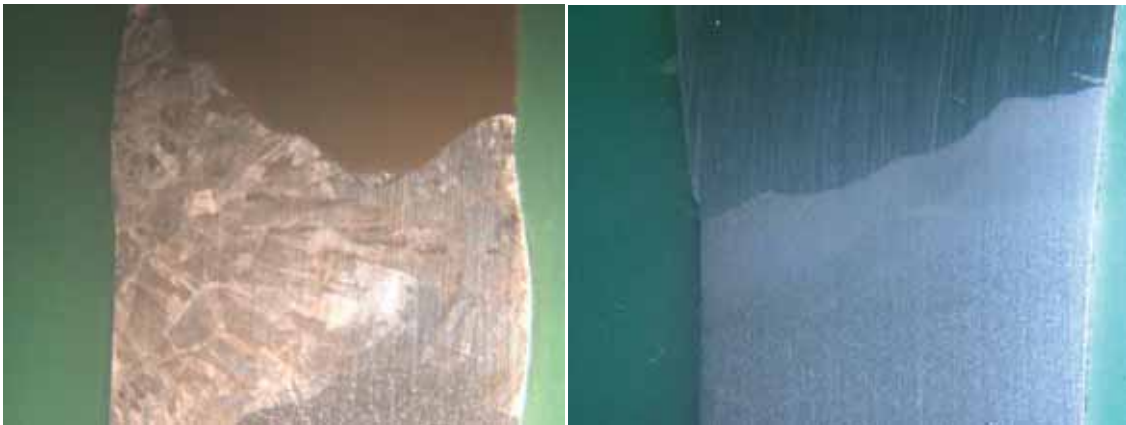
, overview of sample 5 with etched weld metal (2x)
